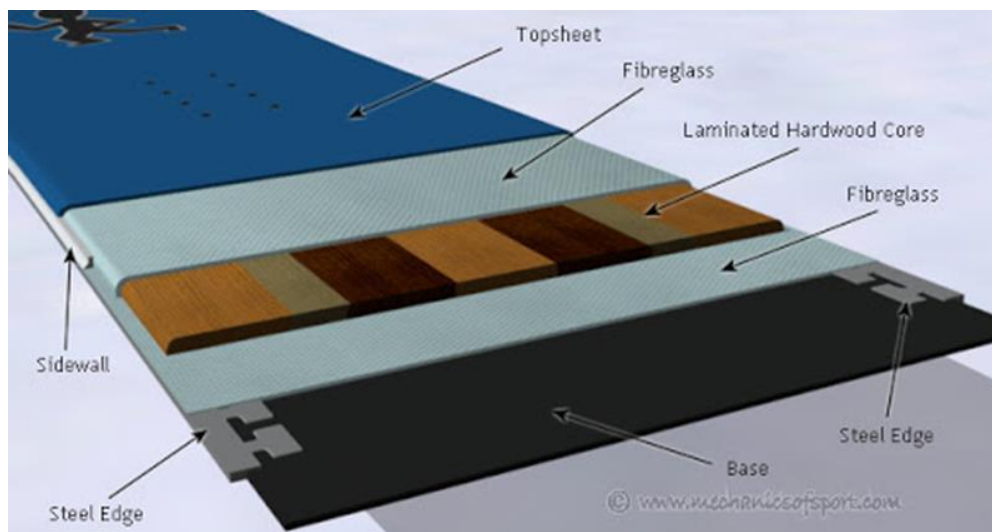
Sandwich construction of a snowboard (Mechanics of Sport, n.d.).
